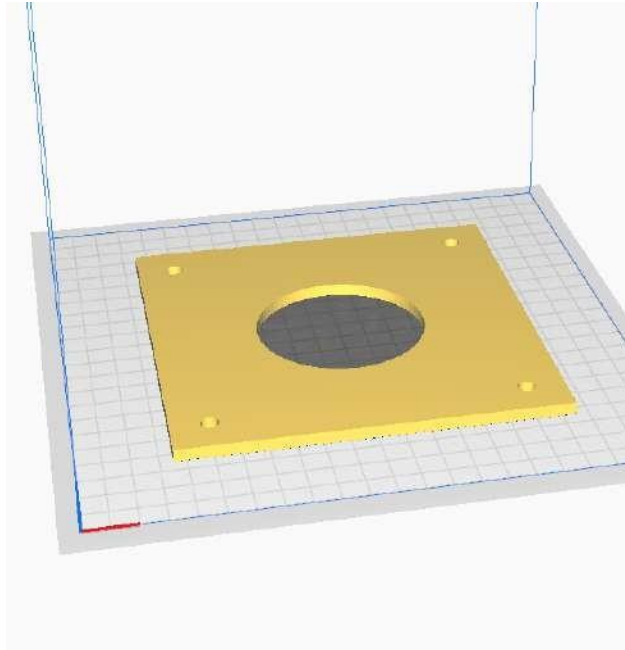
Plaque for attaching the nozzle to the frame. Source: own
